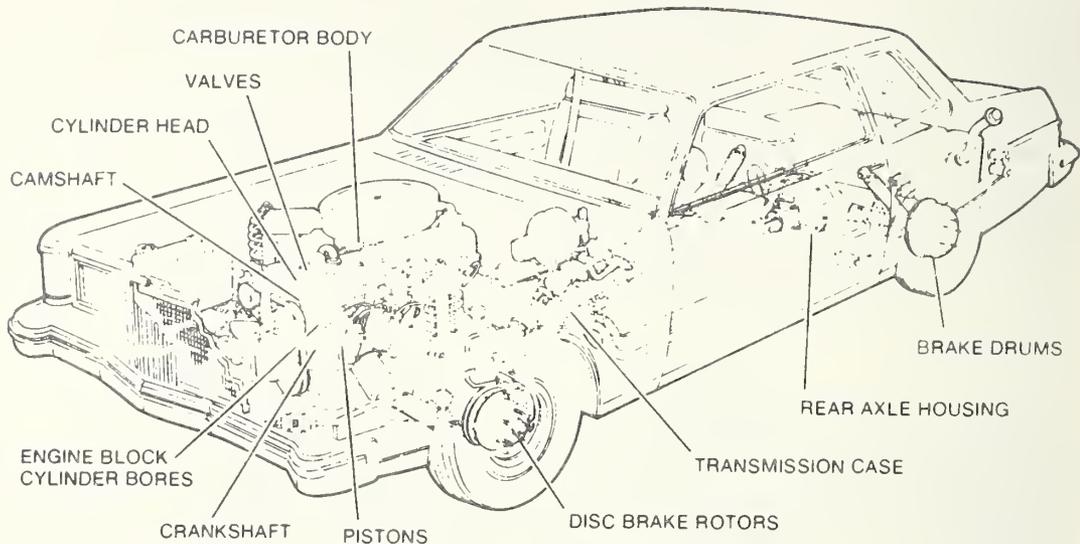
SCHEMATIC DIAGRAM OF AUTOMOBILE
